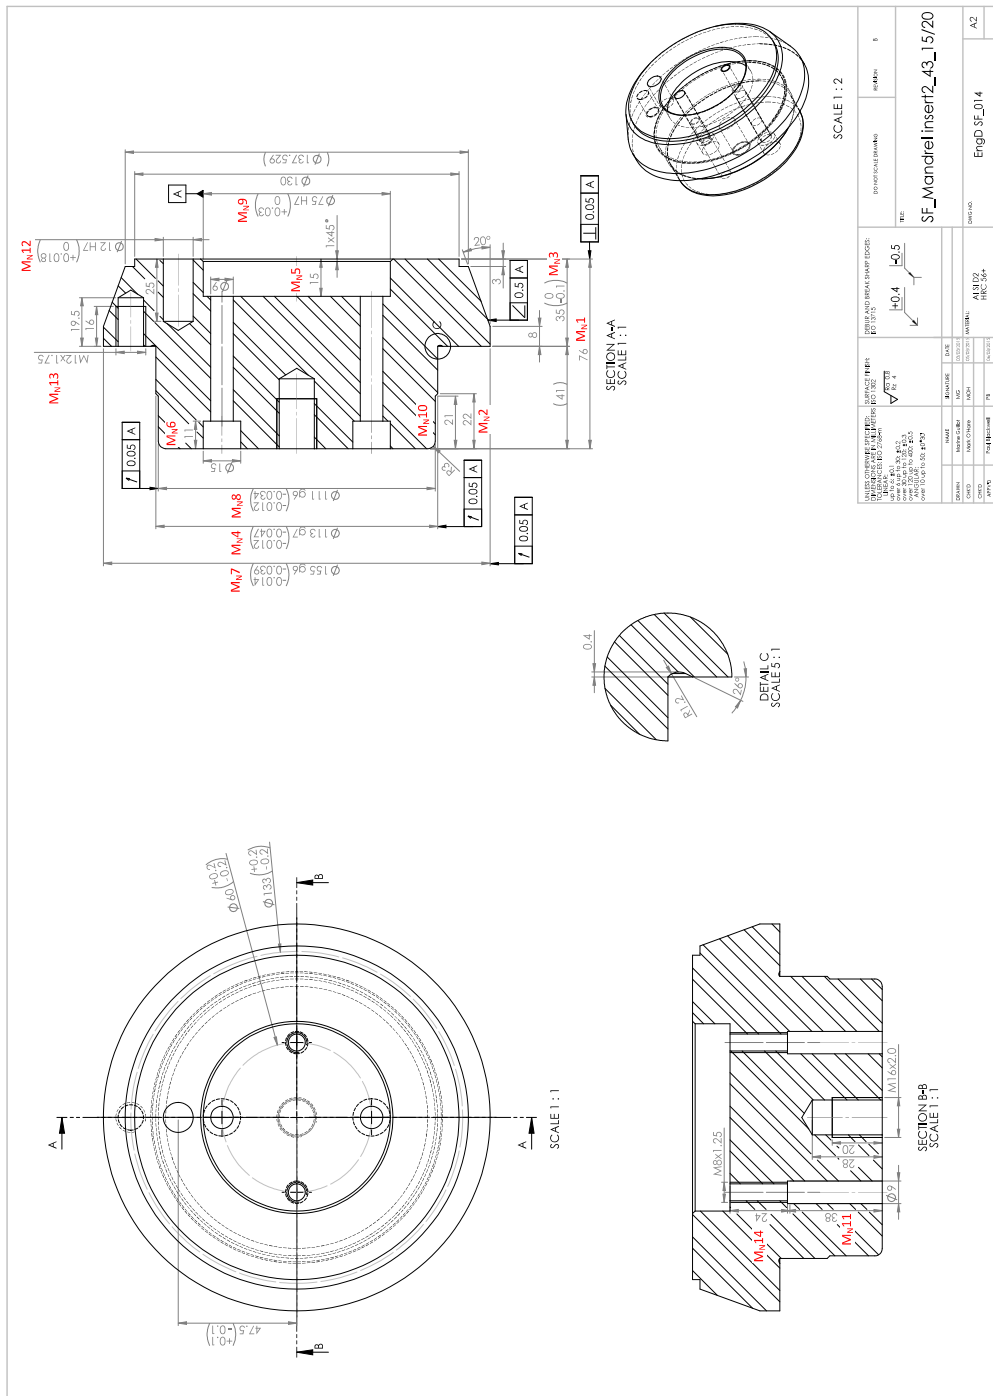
Drawing: Mandrel insert – 43°, for blanks up to 20 mm thick, EngD – EngD SF\_014, “SF\_Mandrel insert2\_43\_15/20”.
